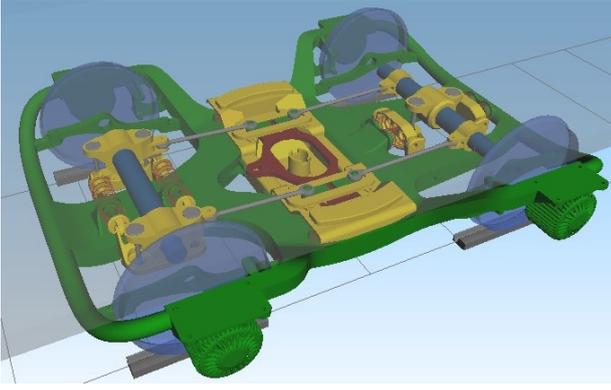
A scheme of a tram car running gear with a radial installation of wheelsets and with wheels of a standard design.
